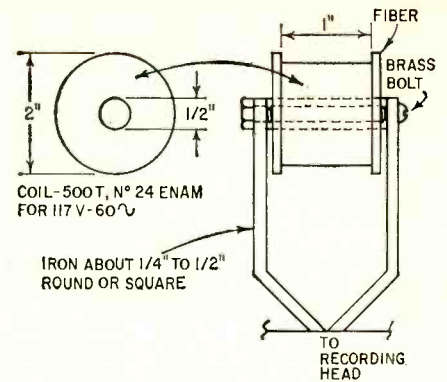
Home-made head demagnetizer. Coil from 110-volt relay may be used. Soft iron pole pieces can be made from frame of junked vibrator.
